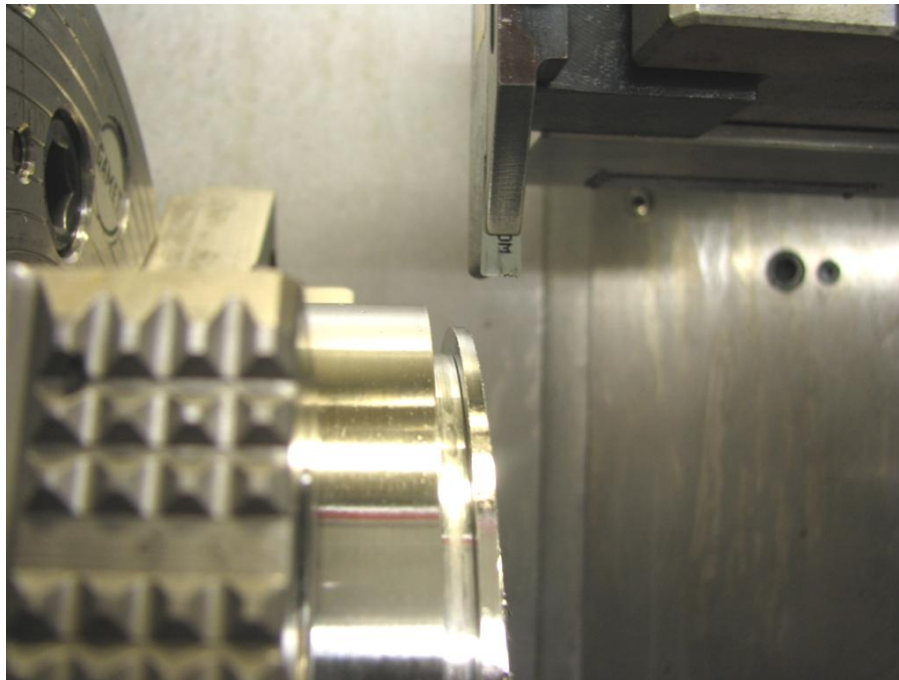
Experimental setup showing the insert and the workpiece with flange.
